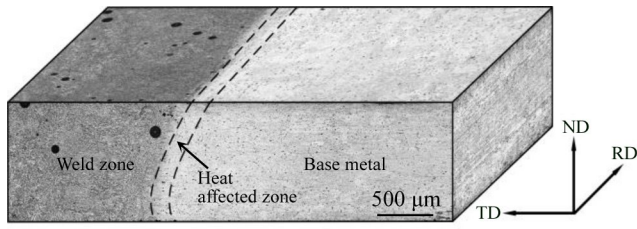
Triplanar macroscopic morphology illustrating the structure of laser welded 2A97-T3 Al-Li alloy joint
